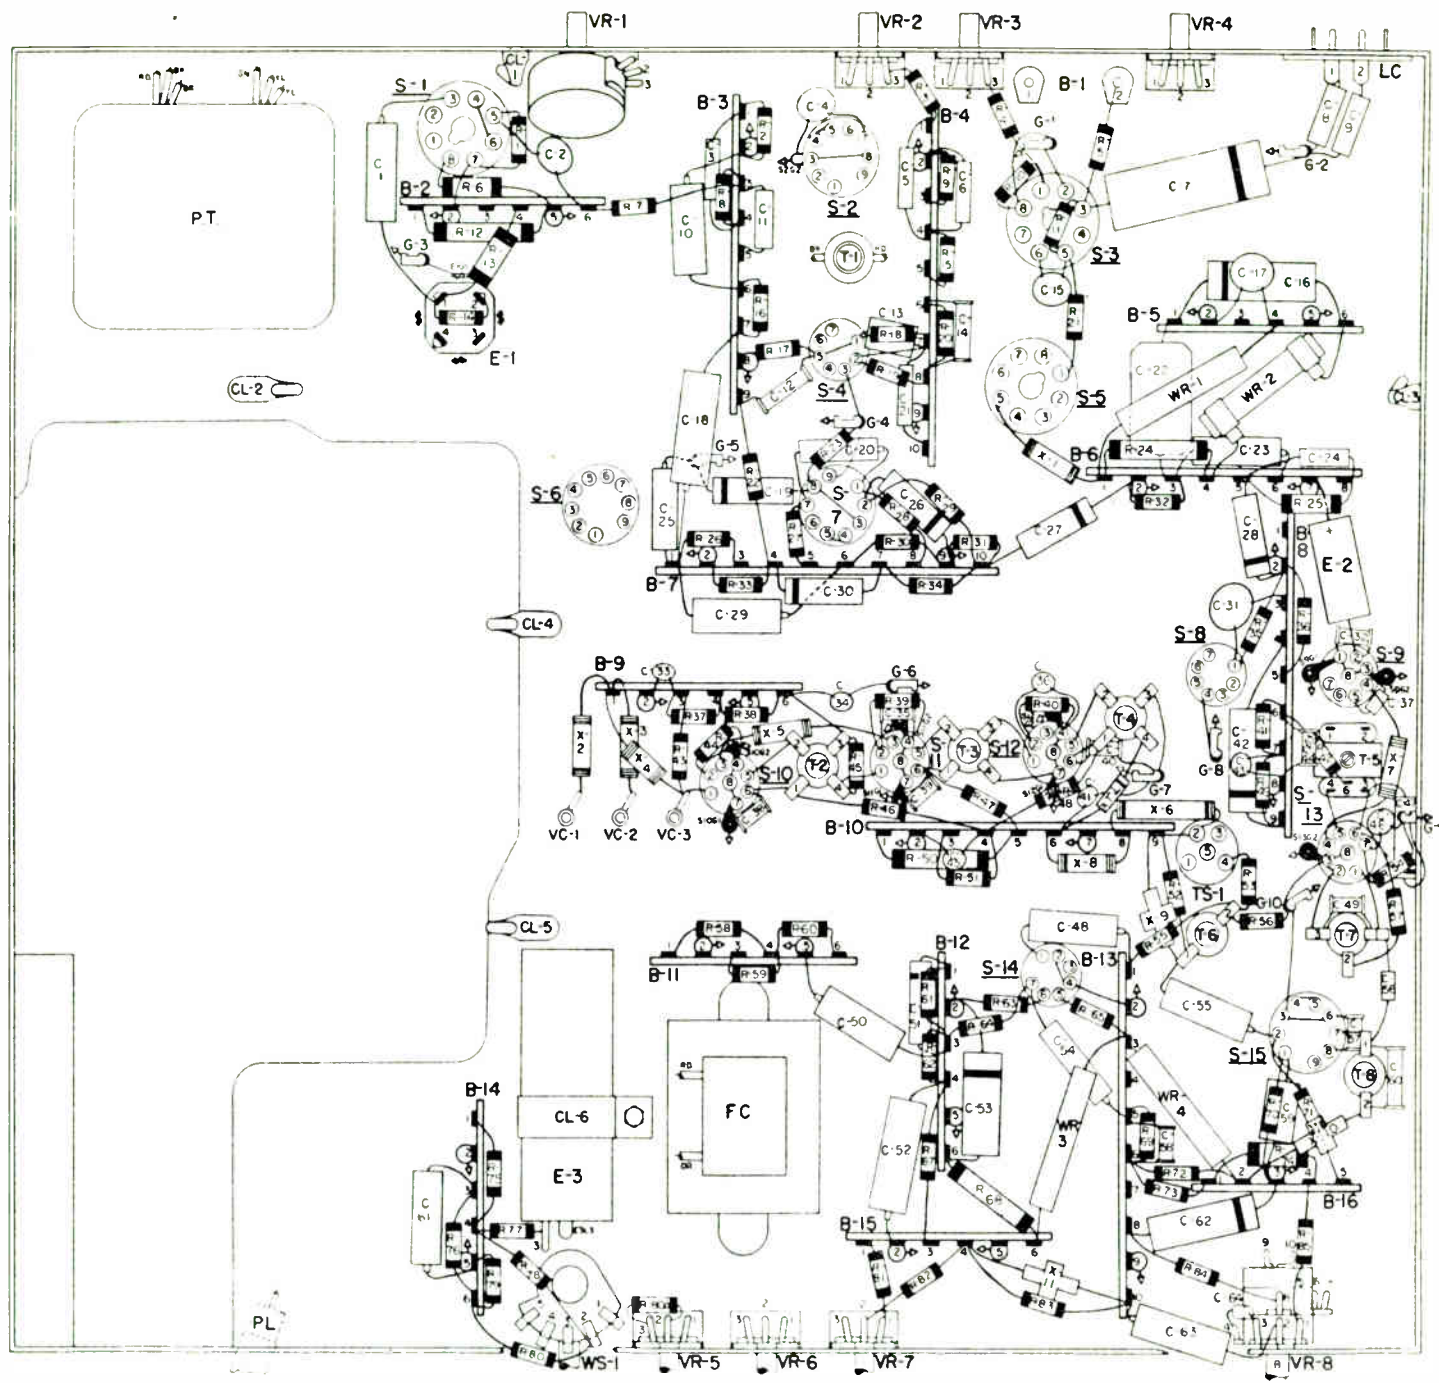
Wiring diagram, bottom view — TV-350 chassis.
